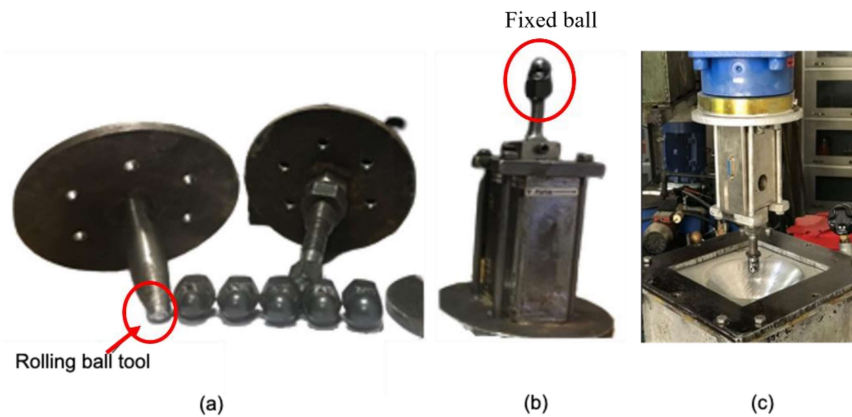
(a) Various forming tools, (b) Forming tool with tool dynamometer, and (c) Complete forming tool mounted on robotic arm.
